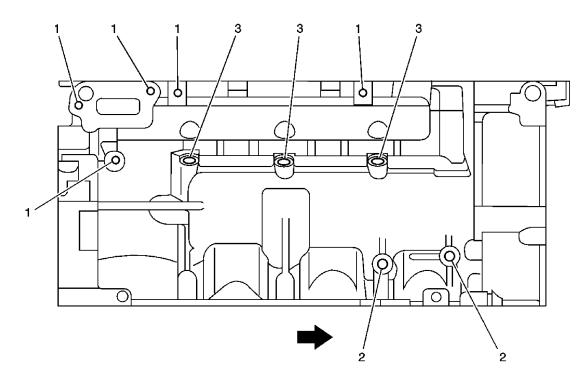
Identifying Bolt Size & Locations On Engine Block - Back View Courtesy of GENERAL MOTORS CORP.
